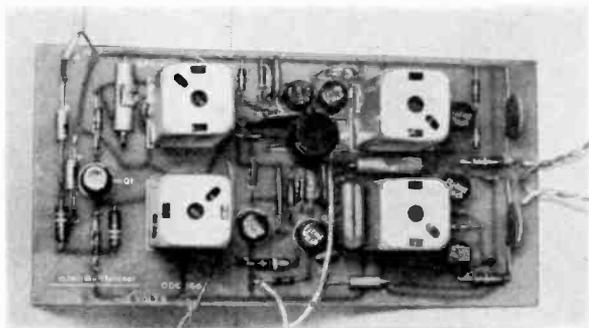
A printed circuit board or any other standard wiring technique can be used. All components are mounted on one side. Keep transistors about $\frac{1}{4}$ " above the board, or install in sockets.
